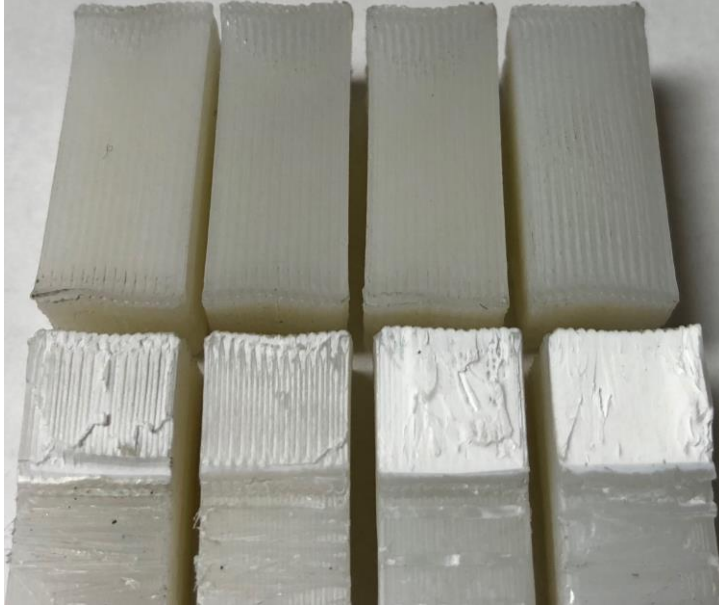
Fracture- and top-surfaces of pure ABS samples with  $B=10$  mm and sharp pre-crack
